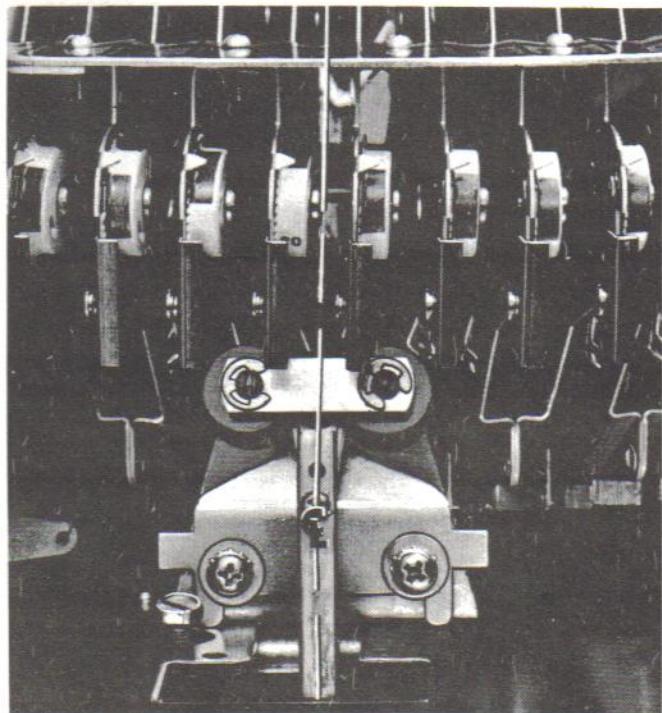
BACK STOP PAWL ADJUSTMENT, 2500
